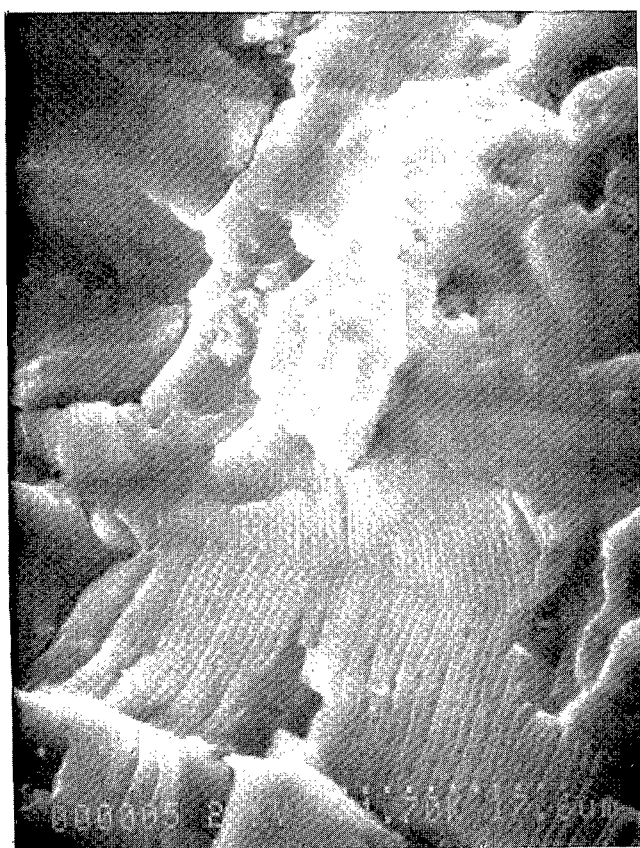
Fracture surface of Weldalite® 049 alloy tested in air at 5 Hz (\approx mm from the notch).
